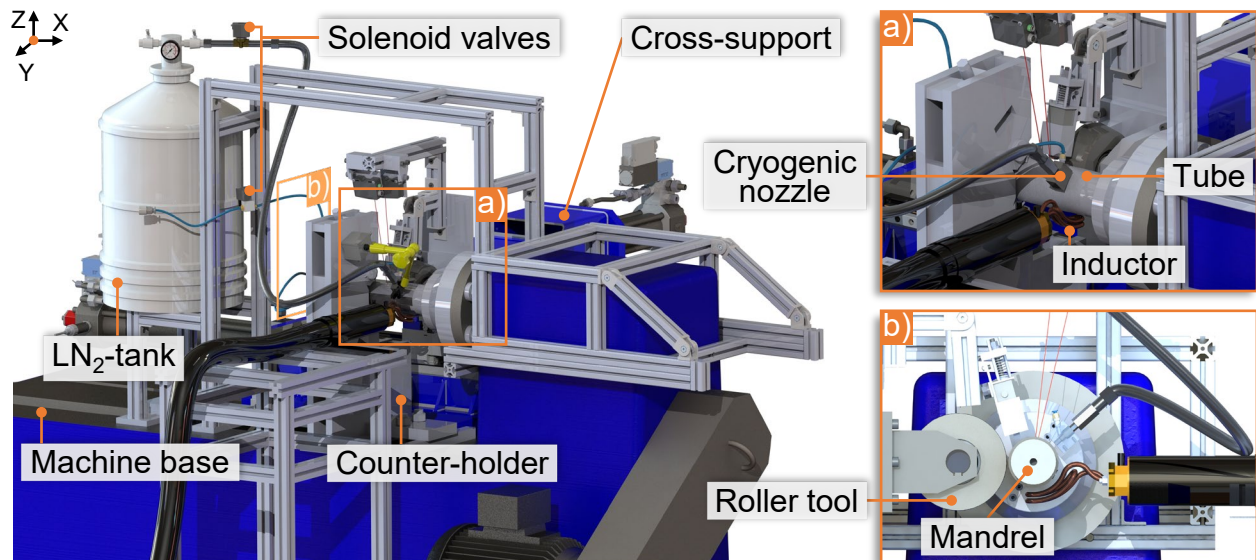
Machine and actuator configuration with a) and b) showing different viewing angles
